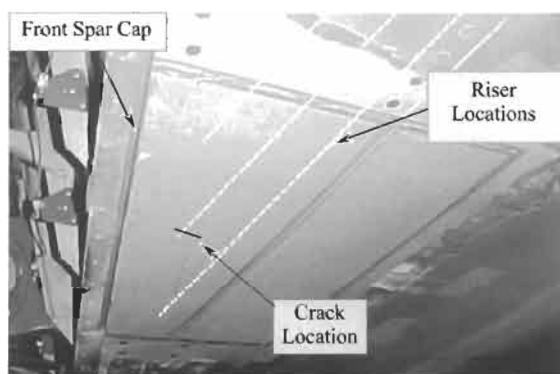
Bonded composite repair over cracks in the lower wing skin of the C-141.
